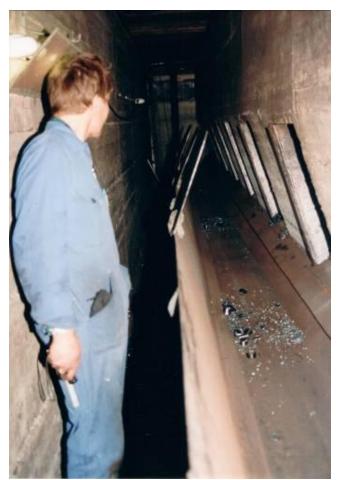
Under the machine is the chip tray. 220 KW and the large torque chips are so large as flat iron, removed here.
